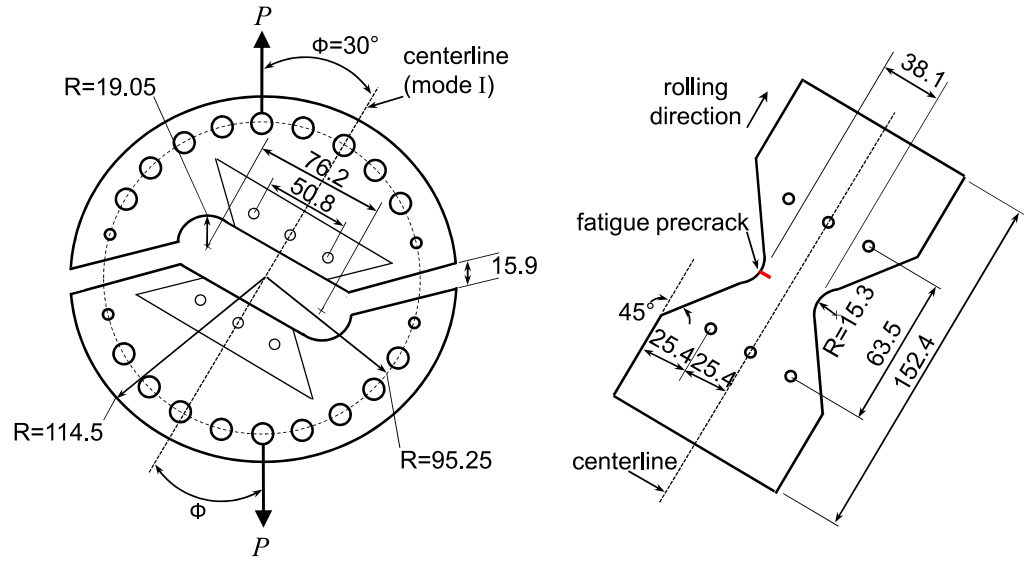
Schematic of Arcan test fixture (left) and 2.3 mm thick fracture specimen (right). Load, P , can be applied at different pinholes in the fixture to induce mode I/II crack growth in the specimen. Drawings not to scale. All length dimensions in mm.
